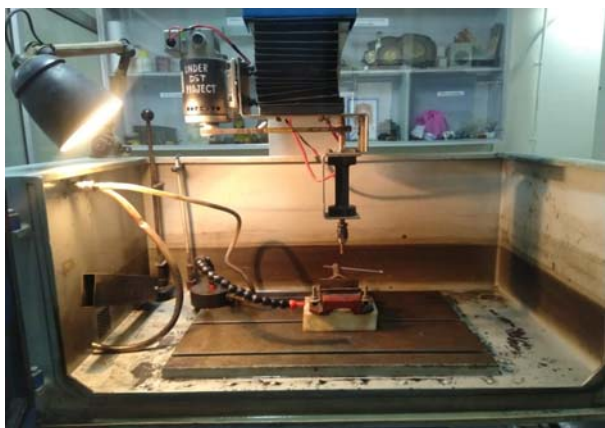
Experimental setup for Electrical Discharge Drilling setup mounted on servo head
